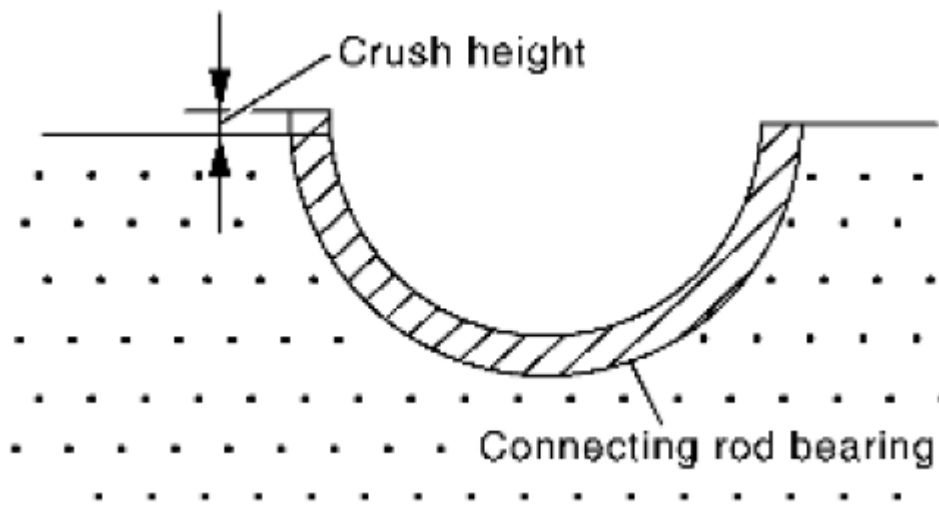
Identifying Crush Height Of Connecting Rod Bearing
